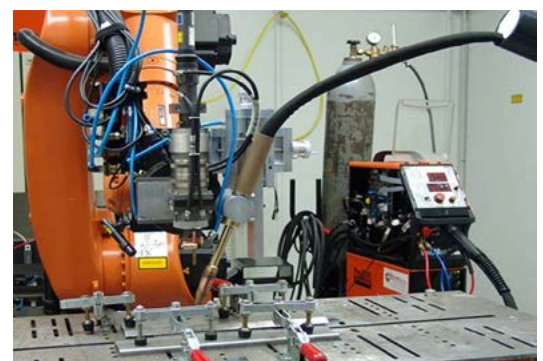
Laboratory station for testing hybrid welding: Trumpf HL 2006D/LCU Nd:YAG laser (2 kW); Kemppi Pro Evolution semiautomatic welding machine
